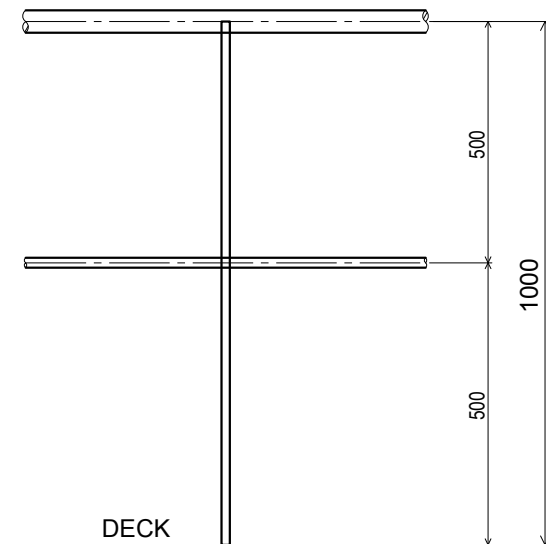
DETAIL OF HANDRAIL STANCHION (COMPANION TOP)
